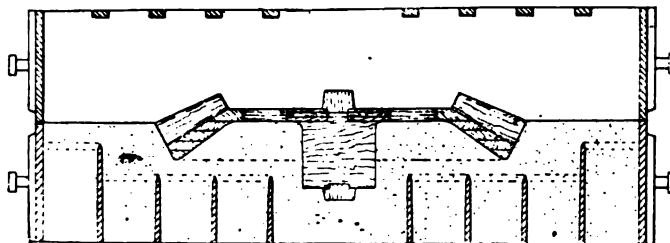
Bevel Wheel in position for Ramming Bottom Face.
